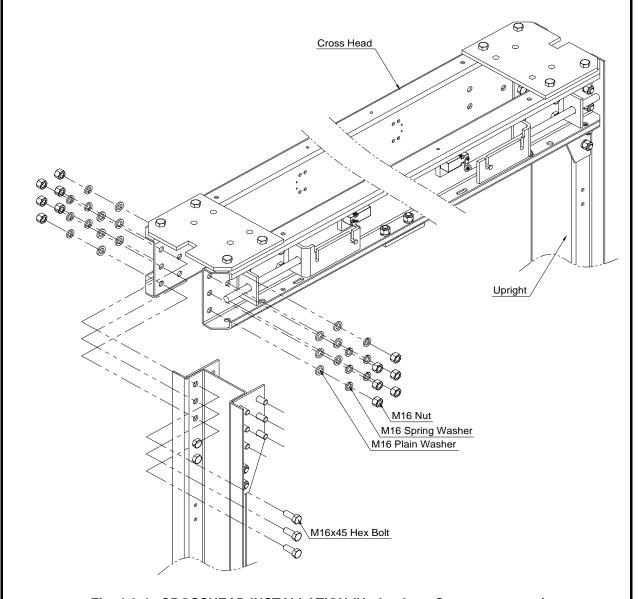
CROSSHEAD INSTALLATION (Underslung Corner post type)
